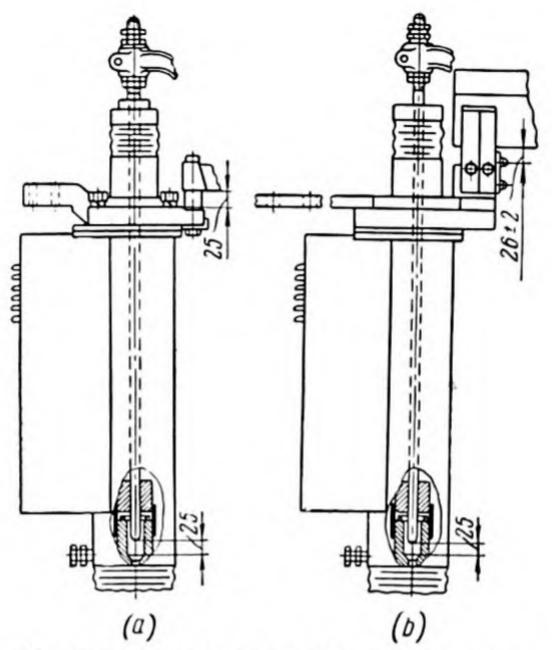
Breaker contacts in the closed position: a-for 2,000-a breaker, b-for 3,000-a breaker
